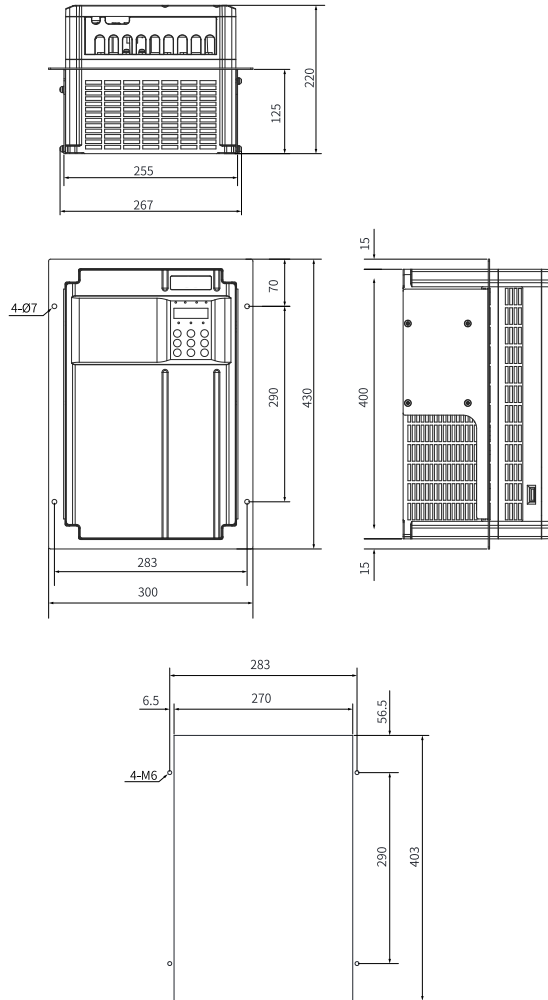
Dimensions of the MD500-AZJ-A1T6 bracket and mounting hole
